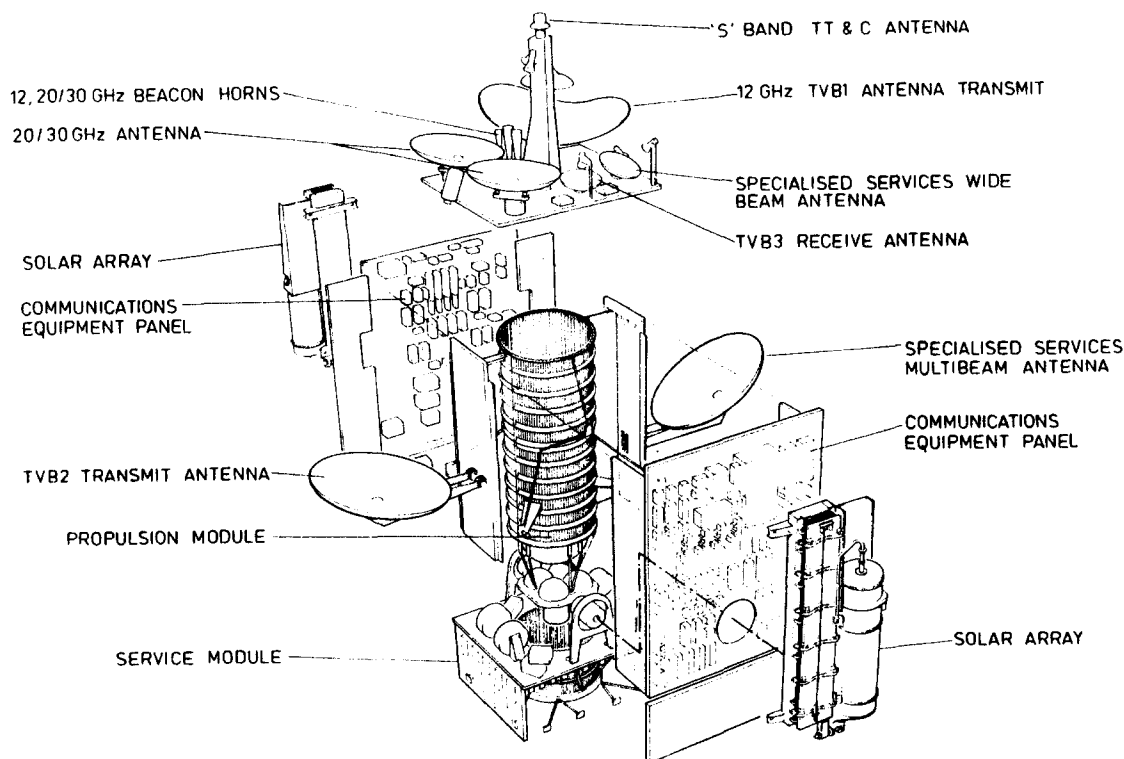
OLYMPUS Exploded View with Stowed Solar Arrays
